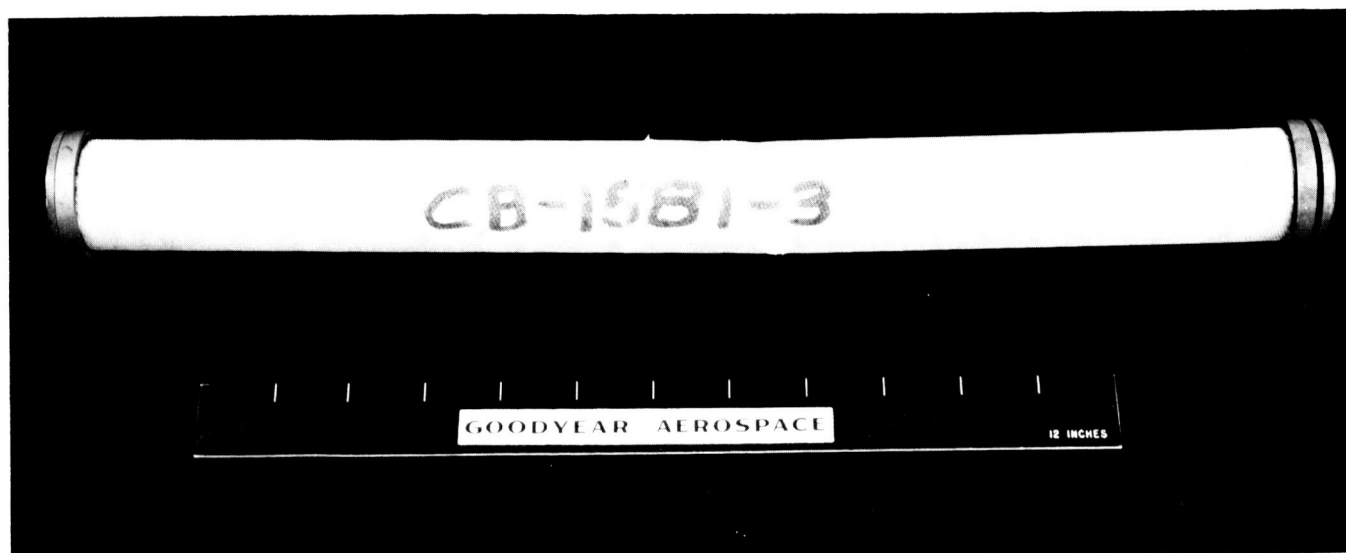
Typical 1581 Cloth Buckled Tube after Test
